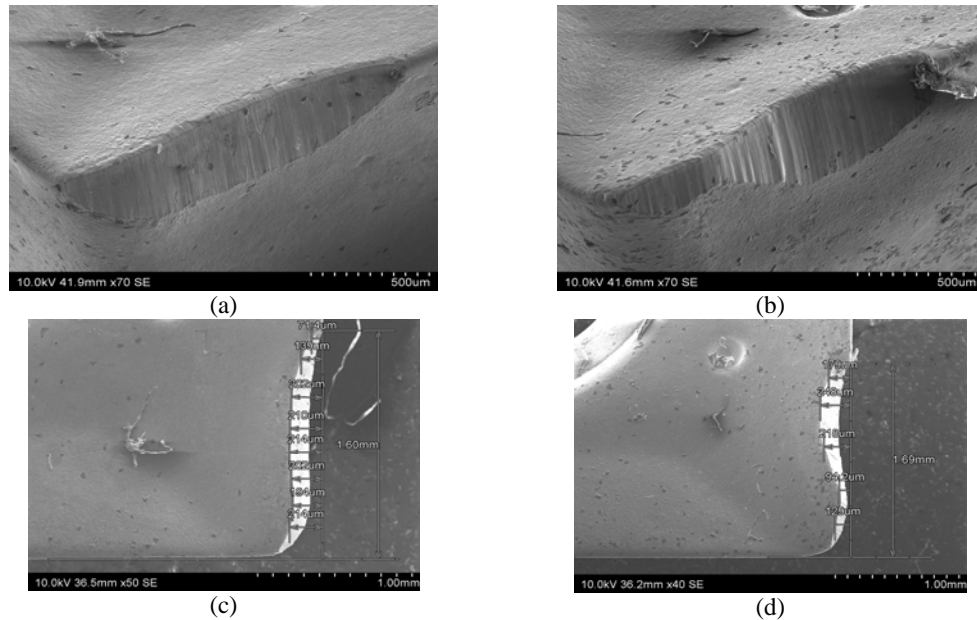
6 SEM images of TiAlN insert after machining after MQL delivered from different positions. (a) 3D insert image for insert used at 12.5°, (b) 3D insert image for 45°, (c) image of the rake face for 12.5° and (d) image of the rake face for 45°
